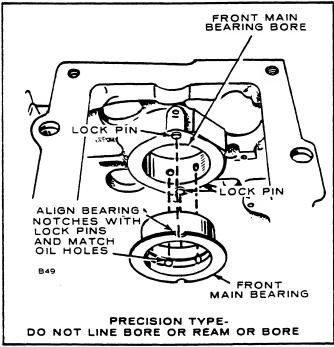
FRONT MAIN BEARING INSTALLATION
